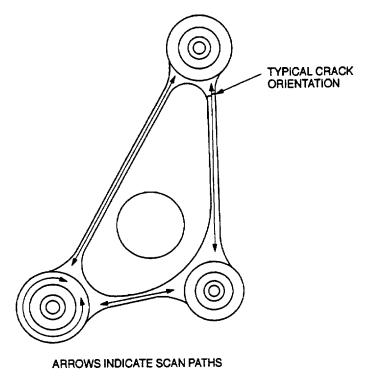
Tail Rotor Cylinder and Support Assembly - Hardware
